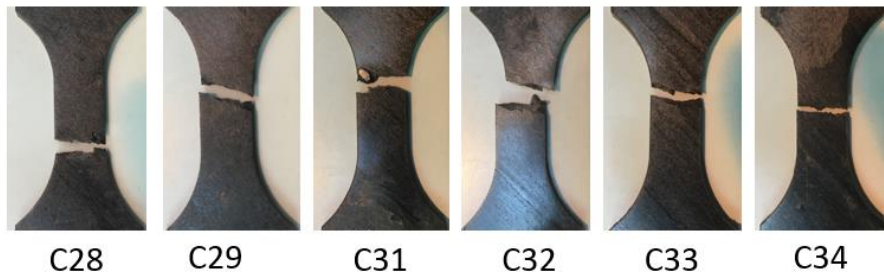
Fracture specimens for 45° coupons at R=0.
